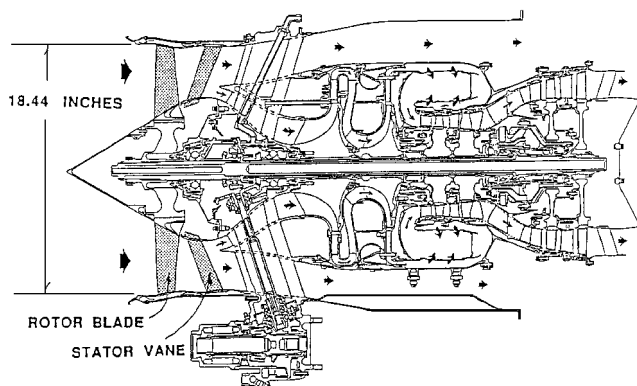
Cutaway view of the Honeywell F109 turbofan engine.
